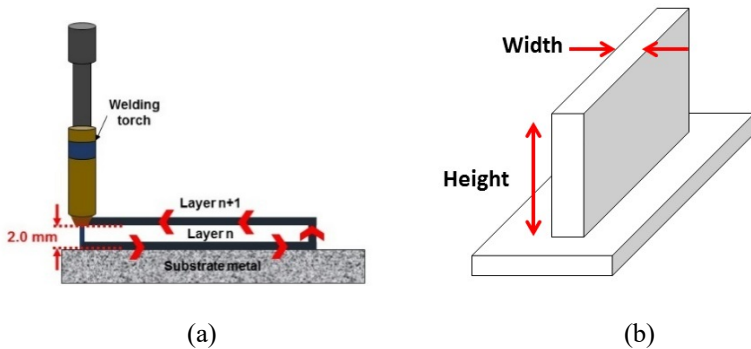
(a) Deposition direction of multi-layer weld bead, (b) Nomenclature of deposited layer output parameters
